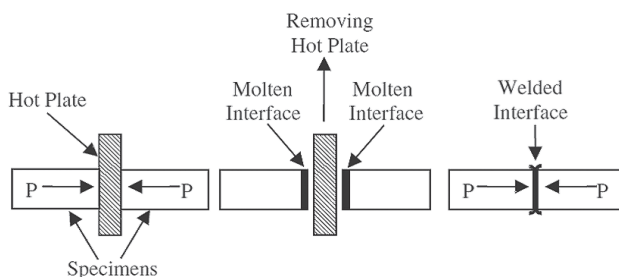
Schematic of the hot-plate welding (Yousefpour *et al.*, 2004).
